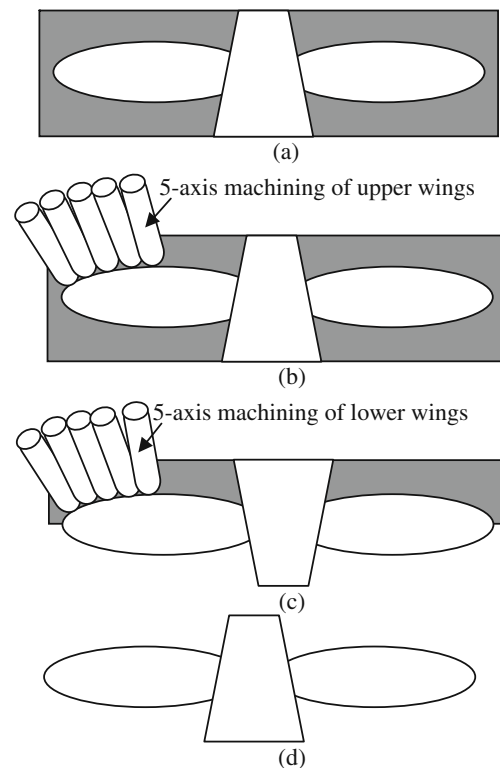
A five-axis machining of a model propeller: a setup, b machining of upper wings, c machining of lower wings, d the completed propeller
